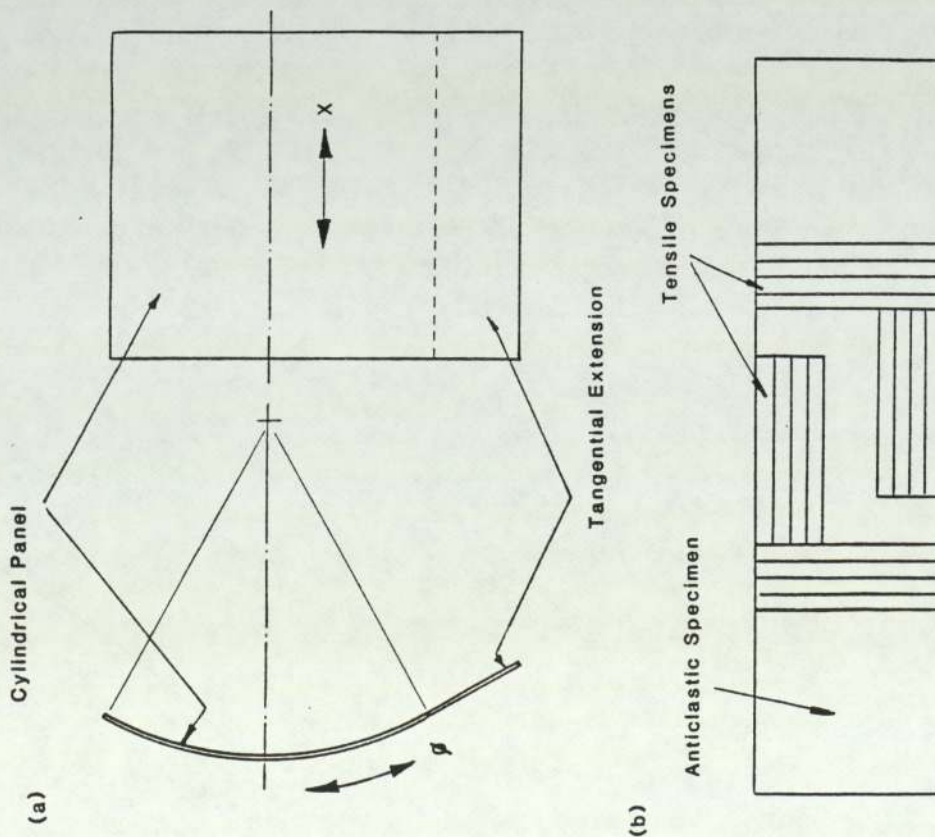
a) Cylindrical panel showing tangential extension piece.
